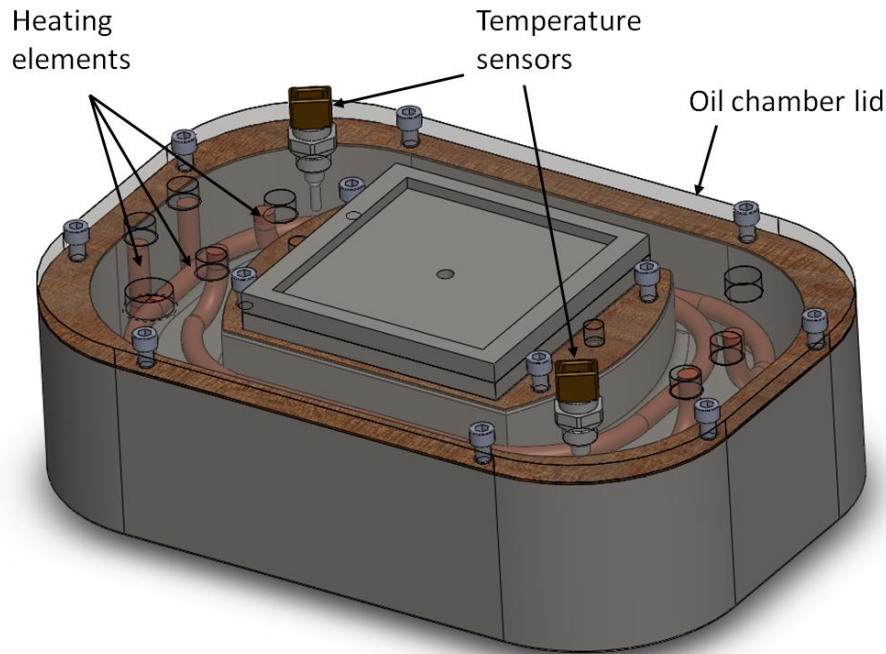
Heating elements and the oil chamber lid of the new mould. The forming surface of the mould tool is heated by the hot oil that fills a large cavity in the tool. Shaped from bendable tube elements and immersed in the oil reservoir, three electric heaters establish and maintain the temperature.
